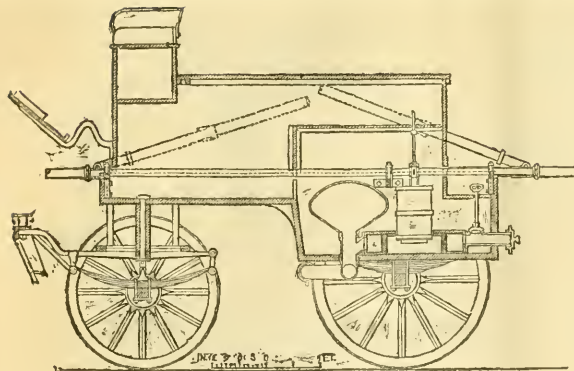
Fire Engine, used by the London Fire Brigade. Longitudinal section,—with the Levers turned up for travelling.
